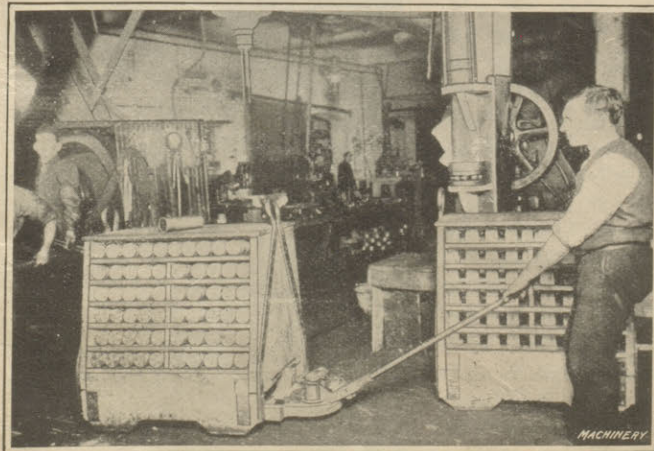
Truck built by the Chapman Double Ball Bearing Co. for transferring Shrapnel Shells about the Shop
